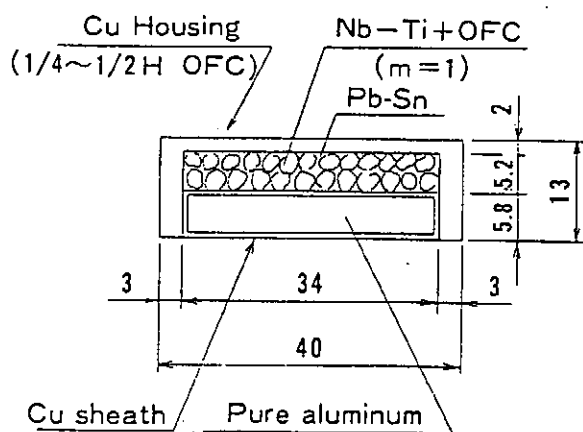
CROSS SECTION OF HELICAL COIL CONDUCTOR
